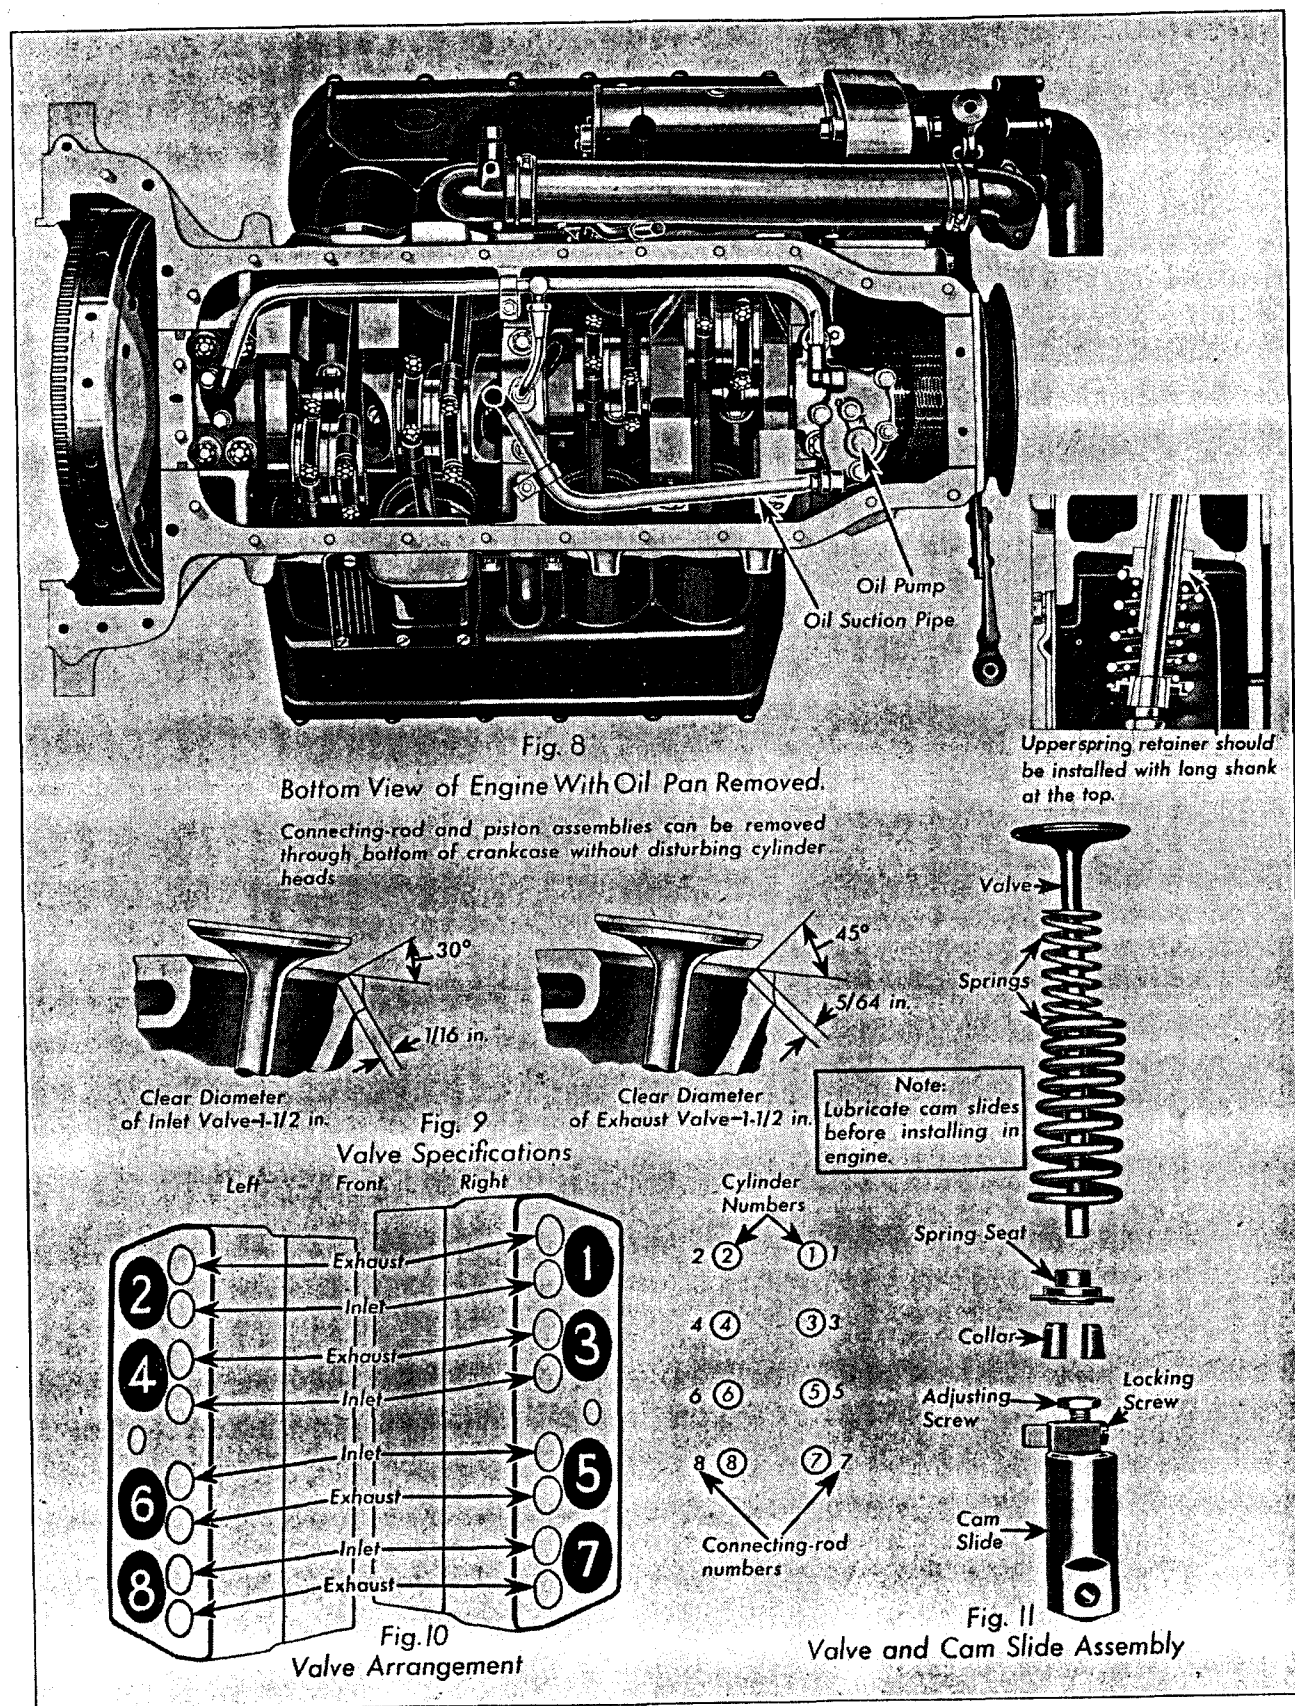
Bottom View of Engine and Valve Details—Cadillac 355-D
